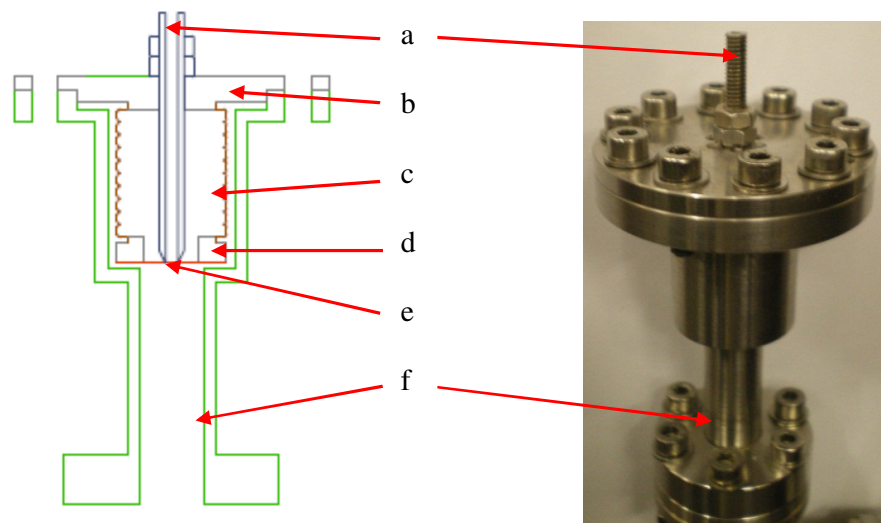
Pressure Cell Blow-off Valve. a: M4 chamfered stud with a hole through centre; b: blow-off valve top plate; c: CuBe spring bellows; d: Cu support ring; e: Cu sheet; f: Blow-off valve support.
